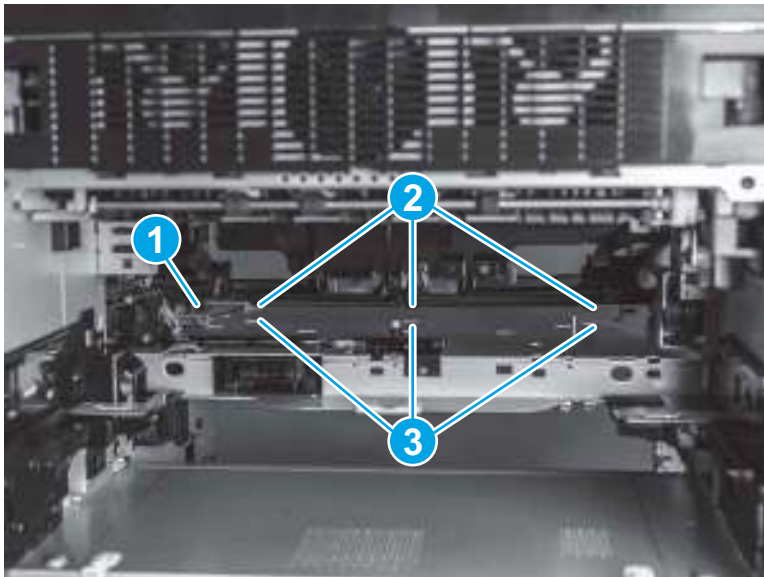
Remove the transfer-holder assembly (3 of 3)
